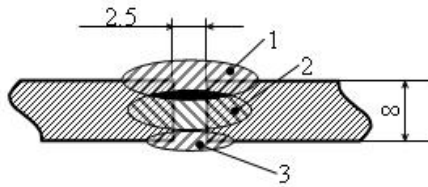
Deposition mode of the layers (1, 2 and 3) at butt welding for both variants CW and UW.
